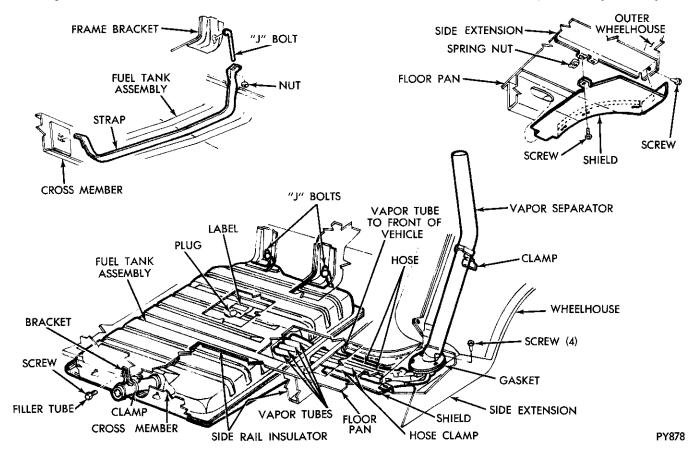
Fuel Tank Assembly (E.C.S.) Evaporation Control System-Sedans
